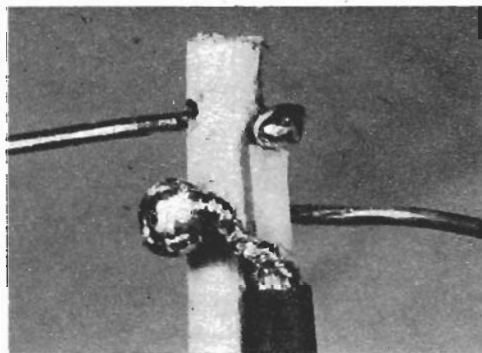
On one dowel (far end) of 6- and 2-meter elements, drill two holes 1/2-in. apart. Solder coax to each end of antenna wire as shown.
